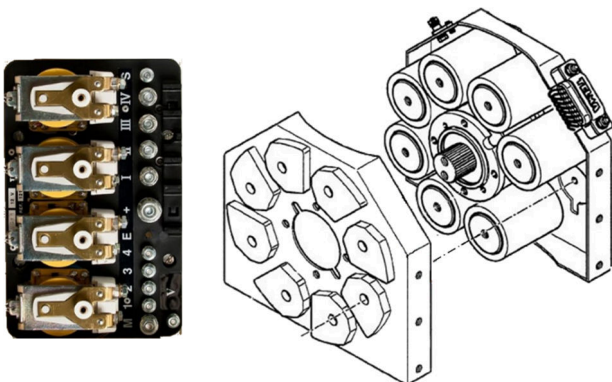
(Left) Brake level control contactors and (Right) exploded view of the dynamometer
